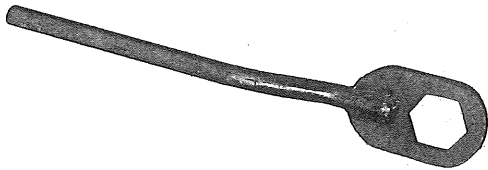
shows a tie rod wrench designed to permit safer and easier tie rod nut adjustments.
